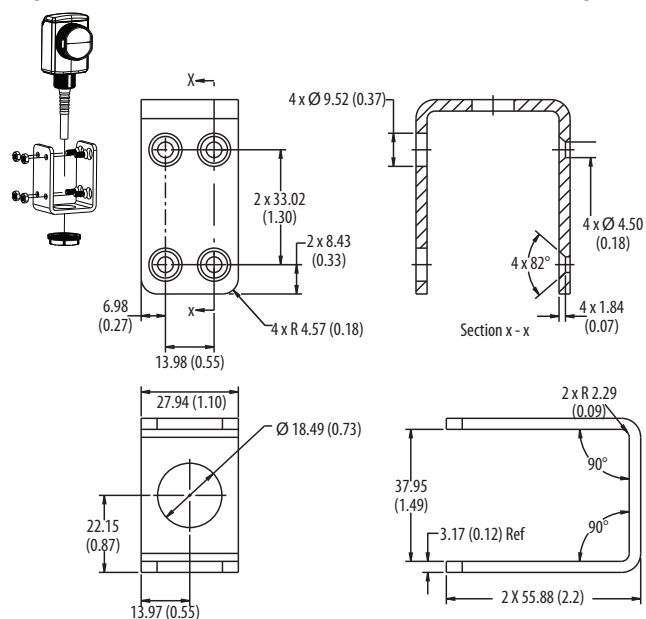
Cat. No. 60-BAF-SM 30 mm (1.2 in.) Bracket Side
